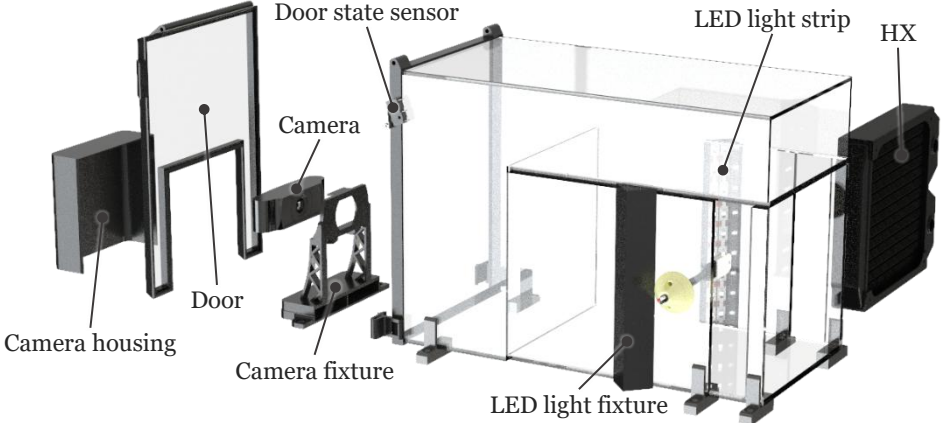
Exploded rendered view of the wind tunnel section, highlighting the components used for CV.
